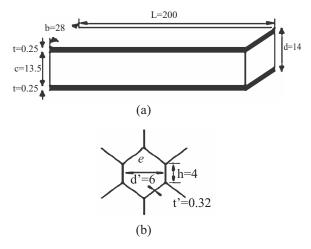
Geometrical Dimensions in mm (a) Honeycomb panel (b) Honeycomb cell
